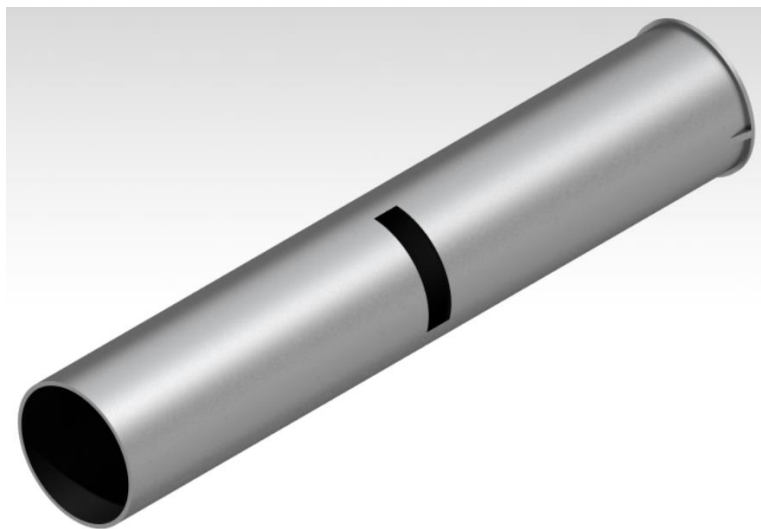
Aluminium cylinder and intake valve nut in CATIA V5
